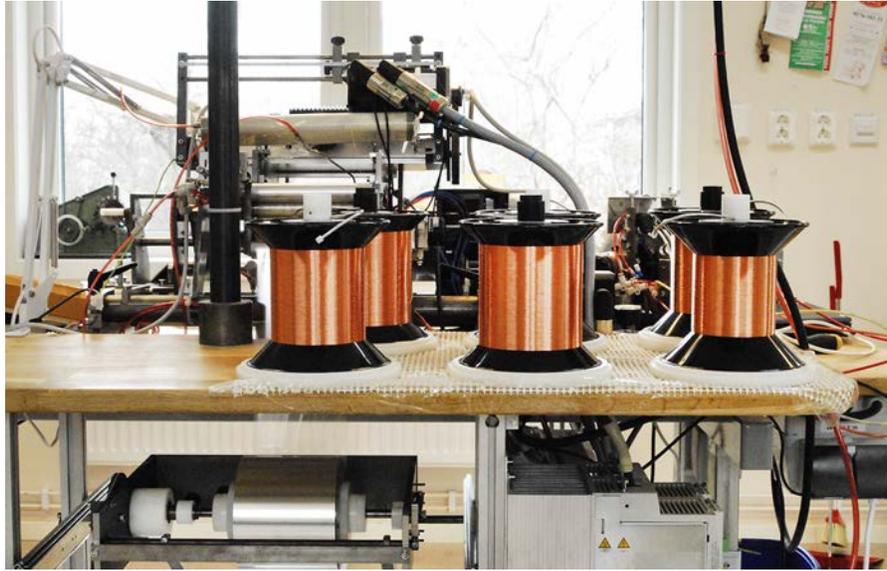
Rear view of a Lundahl coil-winding machine showing wire spools.
